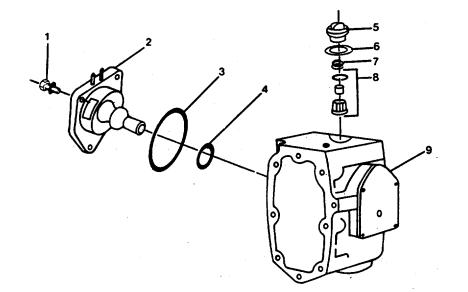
Fuel Pump Electric Governor Actuator and Fluid Filter Element Assembly.
